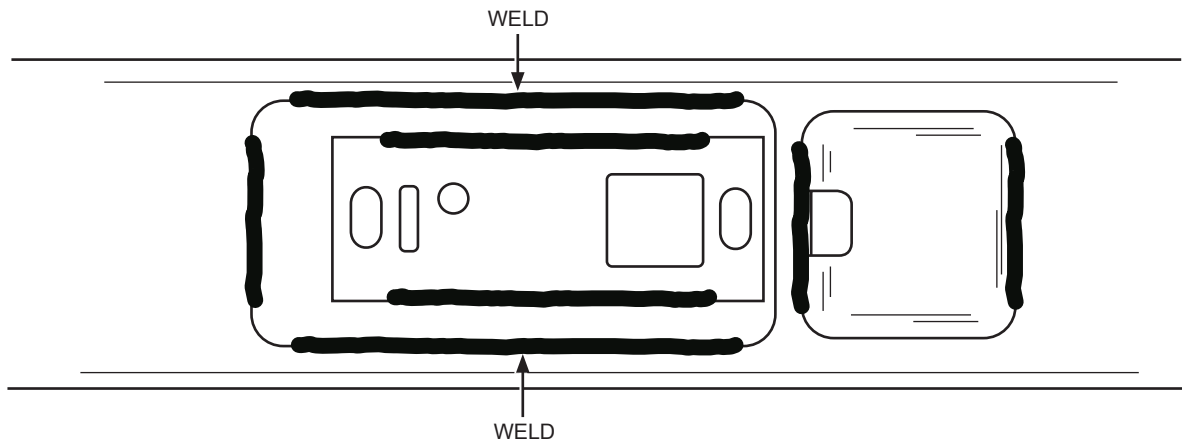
WELD THE CENTER BEARING BRACKET ON THE CROSSMEMBER AS SHOWN
